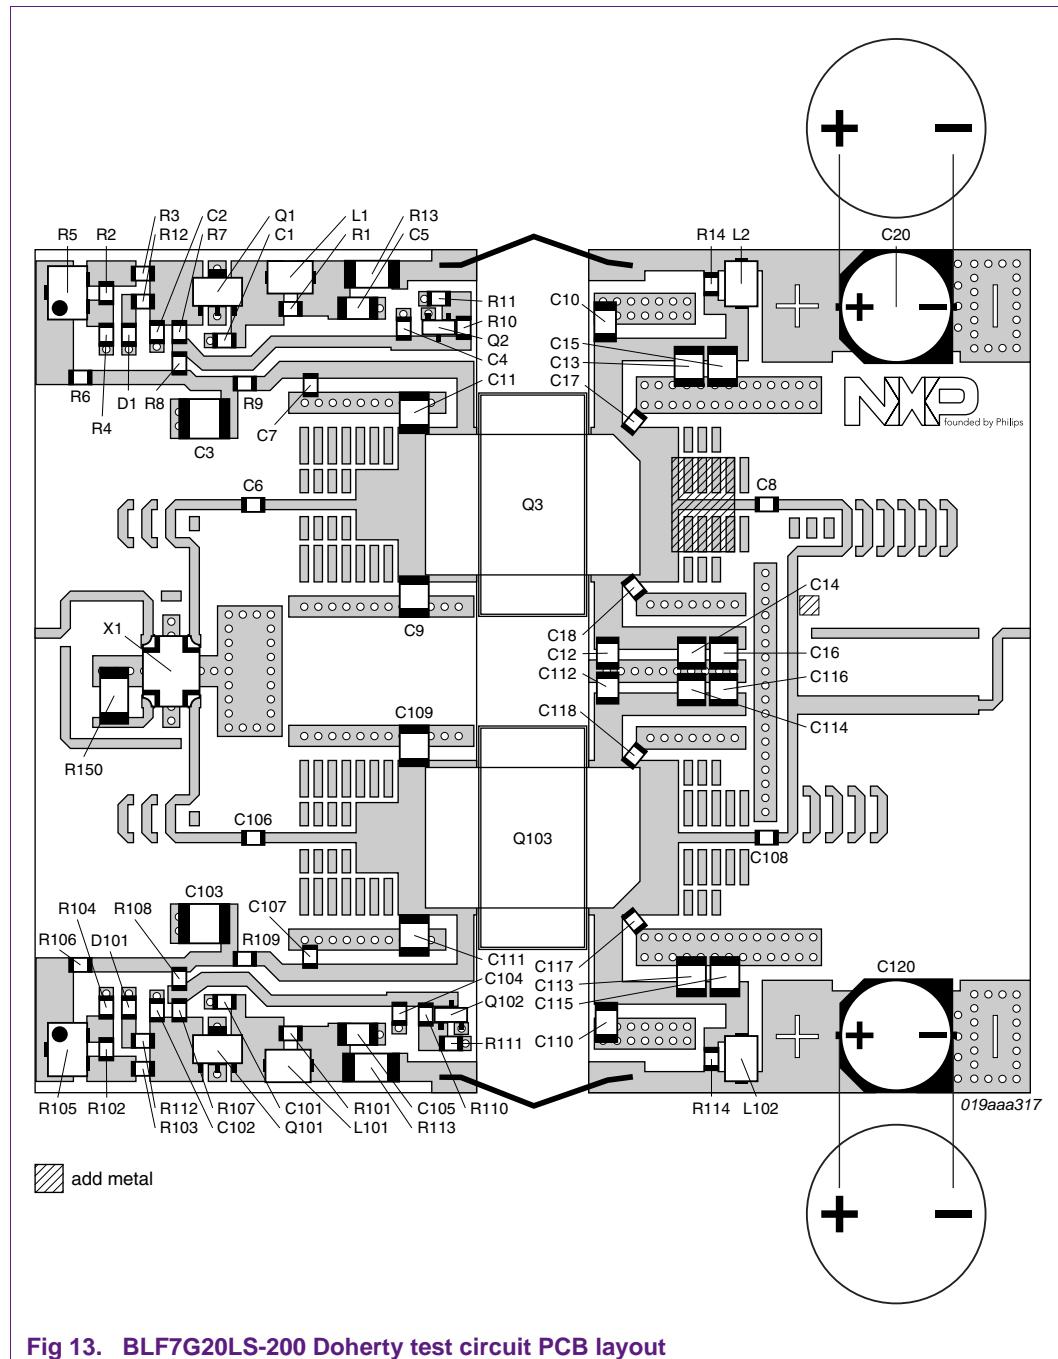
BLF7G20LS-200 Doherty test circuit PCB layout
